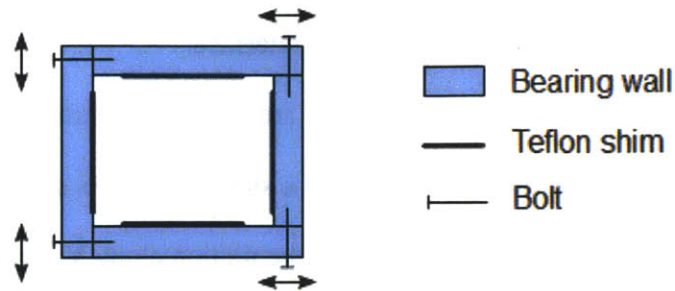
Redesign of the plane contact sliding bearing to allow for more adjustments in the bearing wall position and preload the bearing to desired stiffness.
